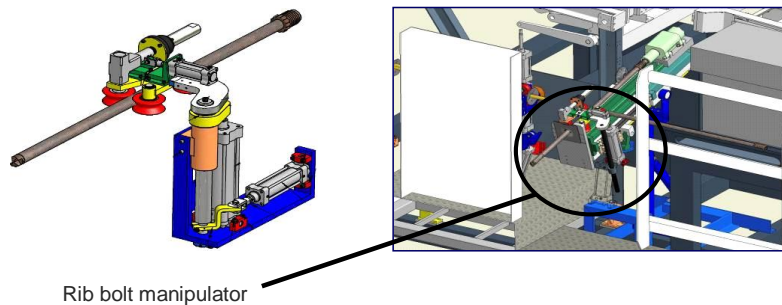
Rib bolter schematic and location on the hydraulic rib bolting rig
